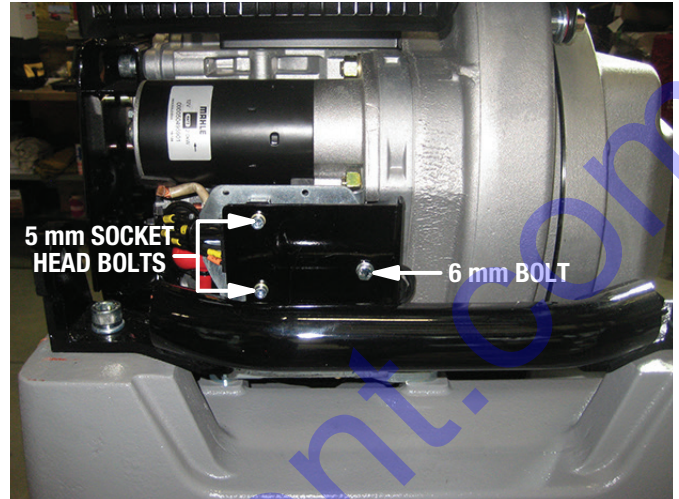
Electrical Panel Bolt Removal (MVH508DZ)
